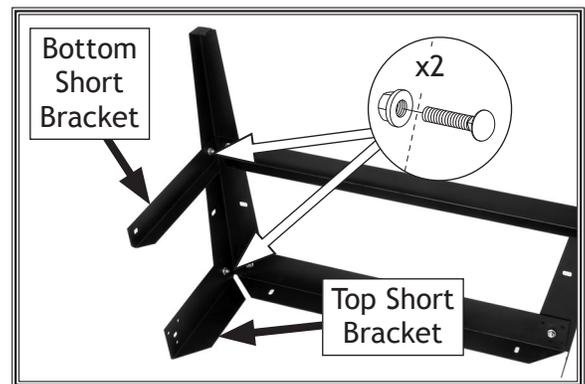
Top and bottom short brackets secured to stand leg assembly.
